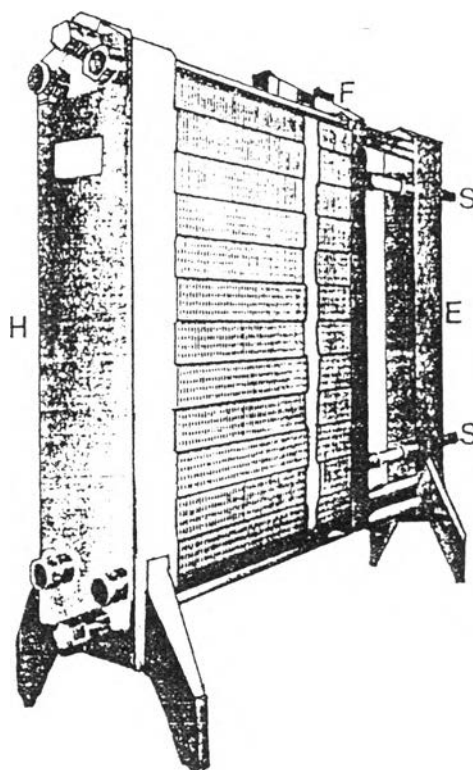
Stainless steel-clad hygienic frame with screw closure
